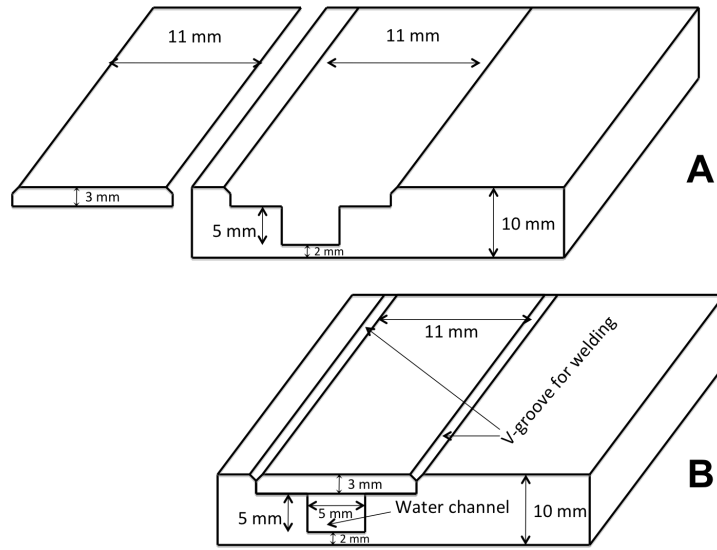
Building of 5 mm × 5 mm water channels inside 10 mm thick aluminium plate. Preparation of T-shaped grooves (A), sealed top portion of the T-shaped groove using a 3 mm aluminium sheet (B).
